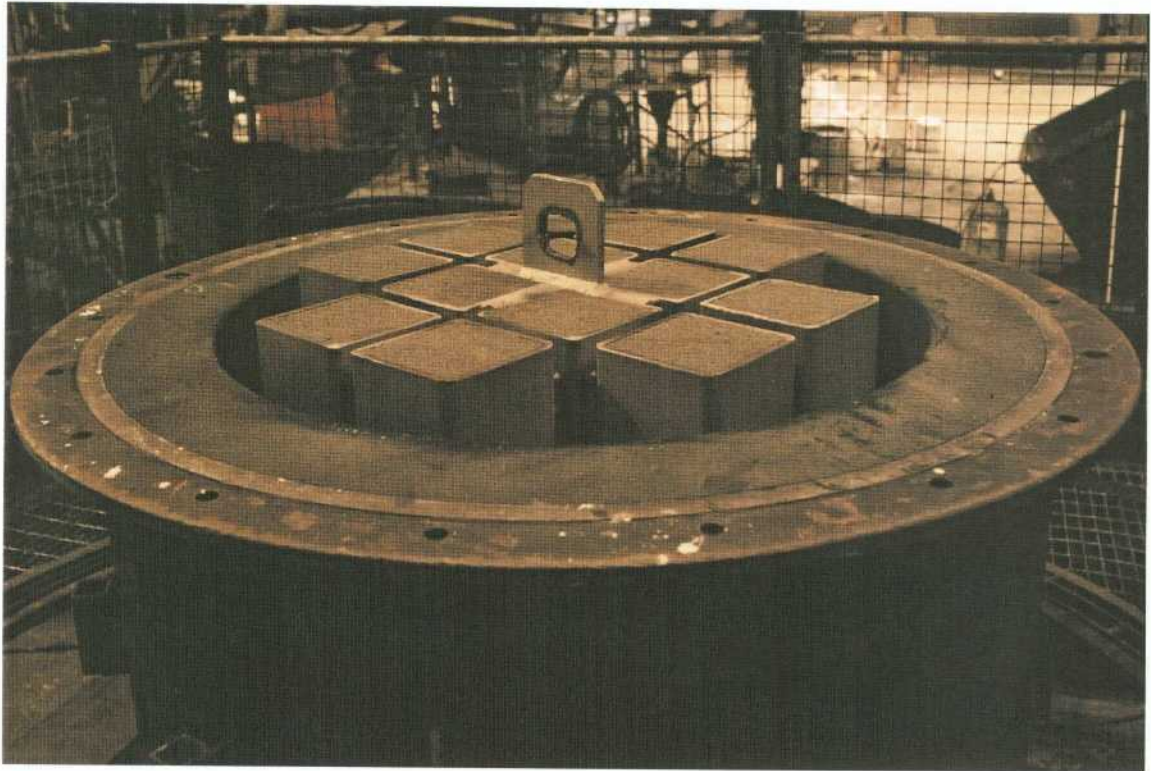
Welded cassette in the casting mould. The channels have been filled with sand in order to withstand the outer pressure of the molten bath.
